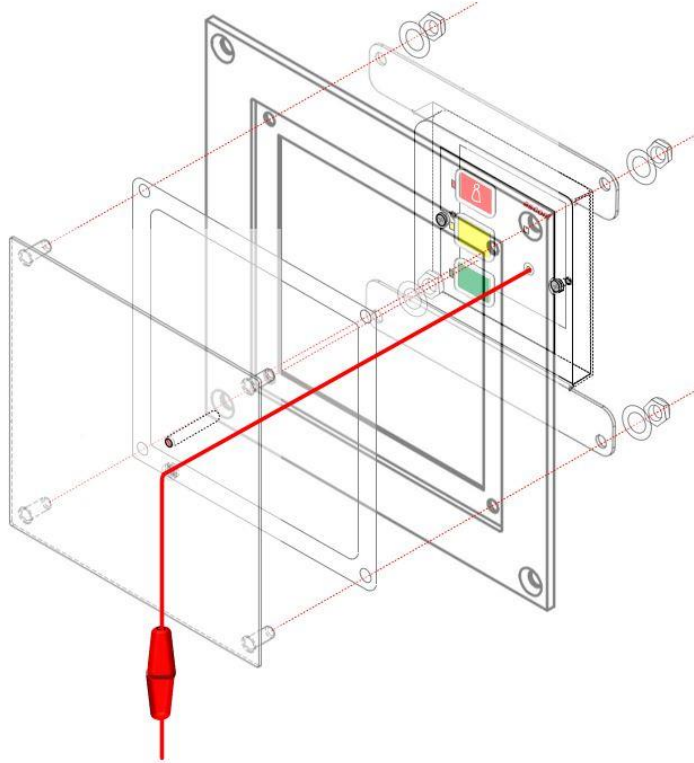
Assembling the pull cord module device panel, device panel gasket, front panel and device frame with Pull Cord Module
